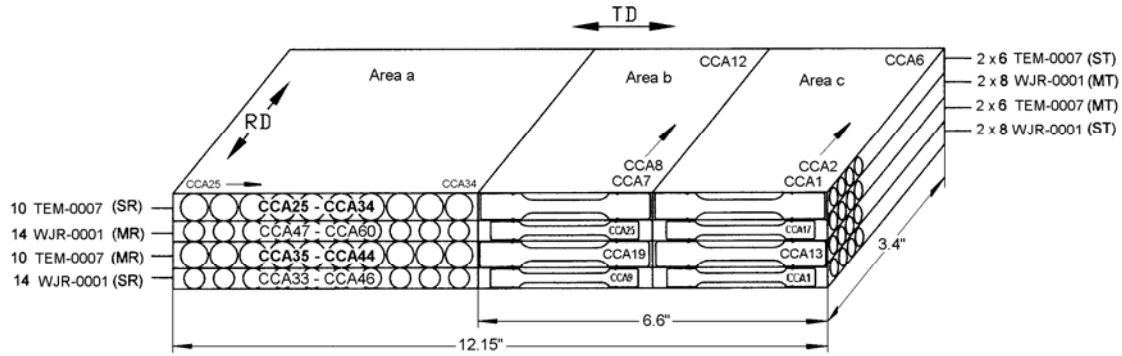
Cutting plan for creep and tensile specimens from CCA Alloy 617 Plate B
